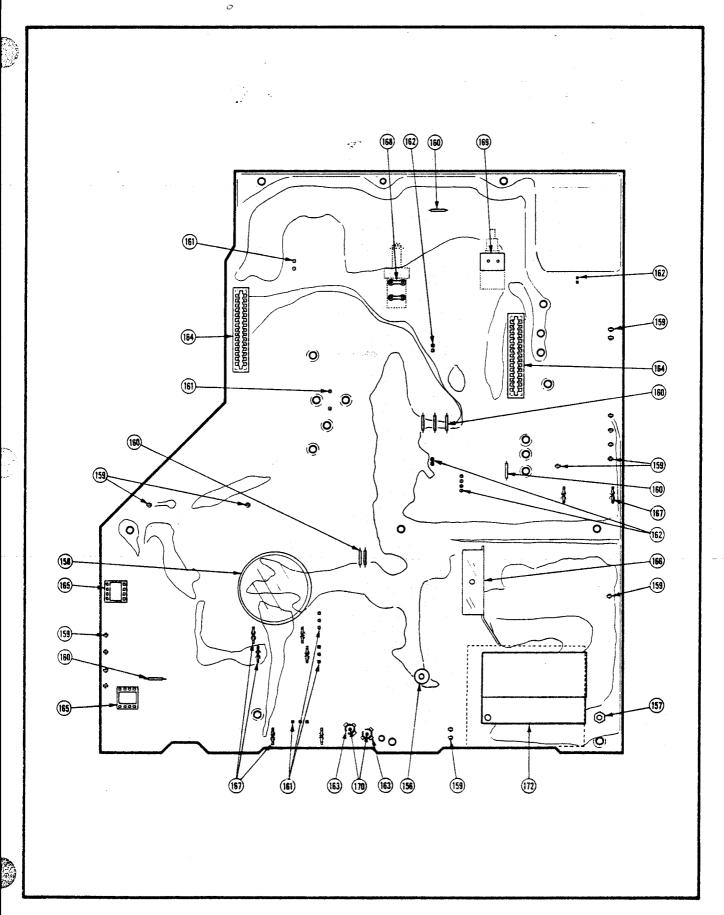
A11 Circuit Board Assembly, interface (sheet 4 of 4).
